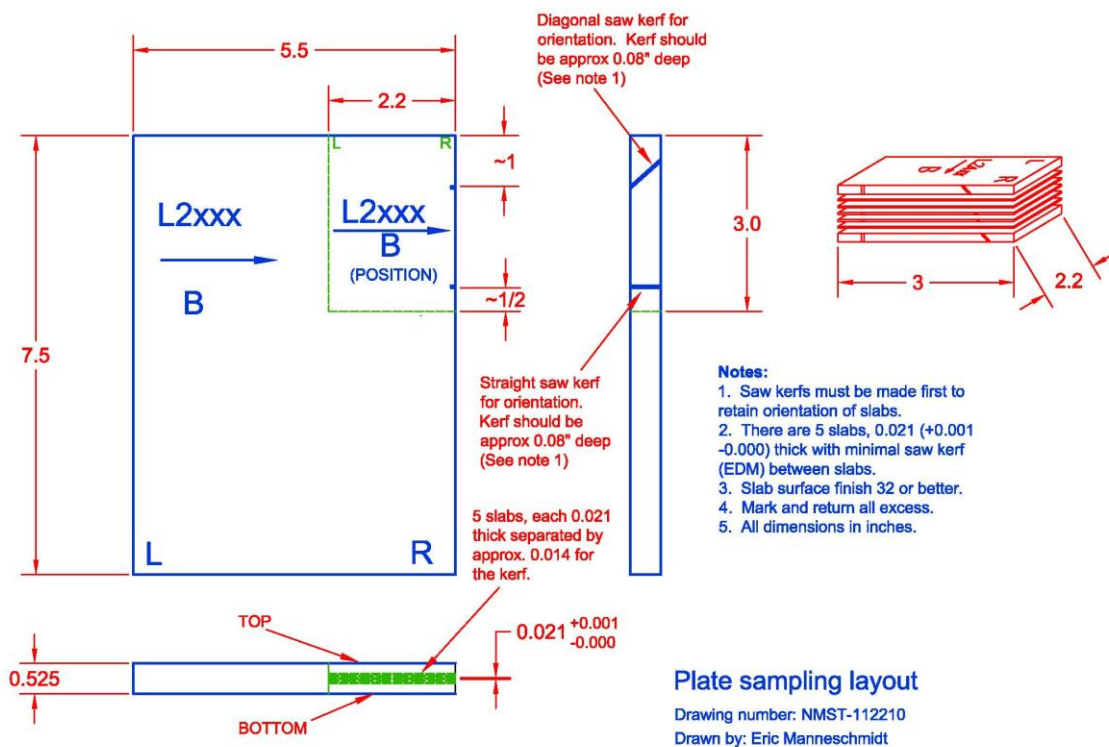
Drawing for machining of "wafers" from each of 50 Rolls-Royce supplied plates.
